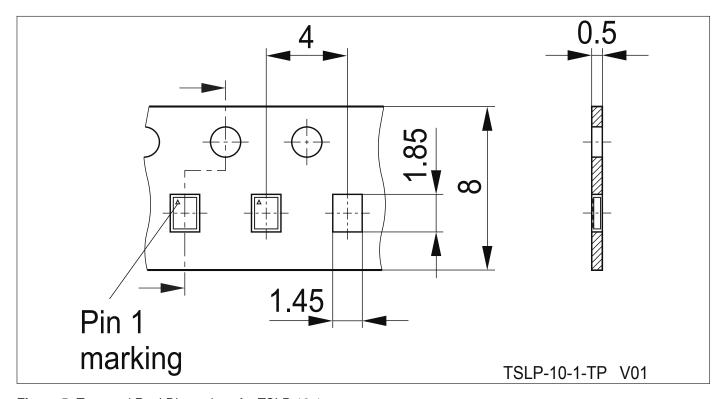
Tape and Reel Dimensions for TSLP-10-1
